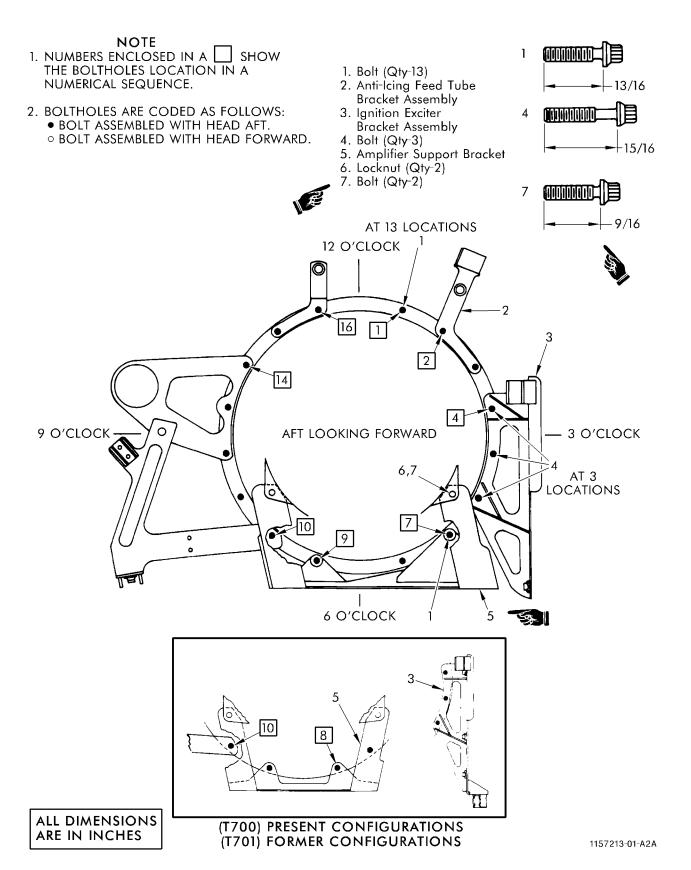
Main Frame-to-Compressor Case; Bolting Diagram
